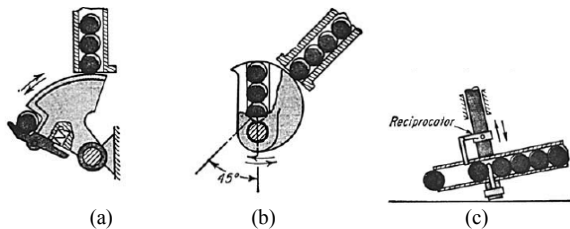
Singulation mechanism to feed accurate amount of parts [19]. (a) & (b) Fixed size carrier. (c) Reciprocating separator.
